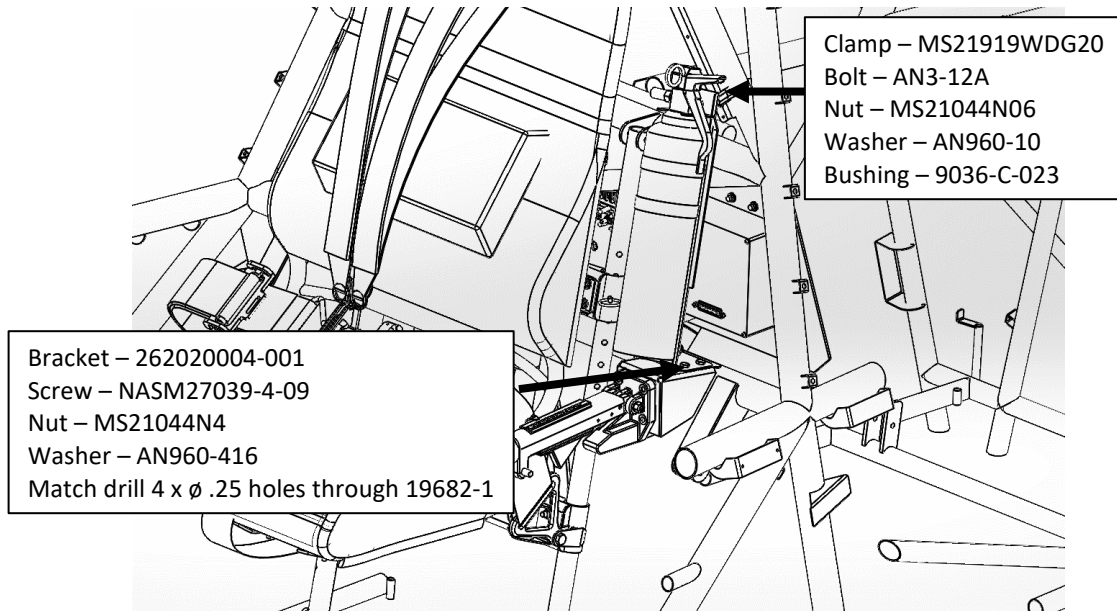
View of installed fire extinguisher – Dual Cockpit
